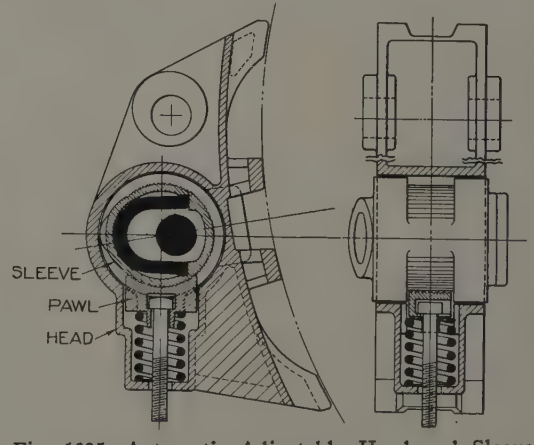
Automatic Adjustable Head and Sleeve for Creco Brake Beams. Chicago Railway Equipment Company.
